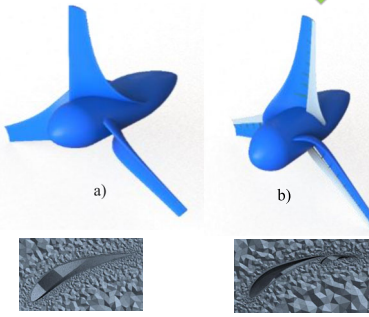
Solid view of the rotors. a) Traditional rotor and b) high-lift rotor
